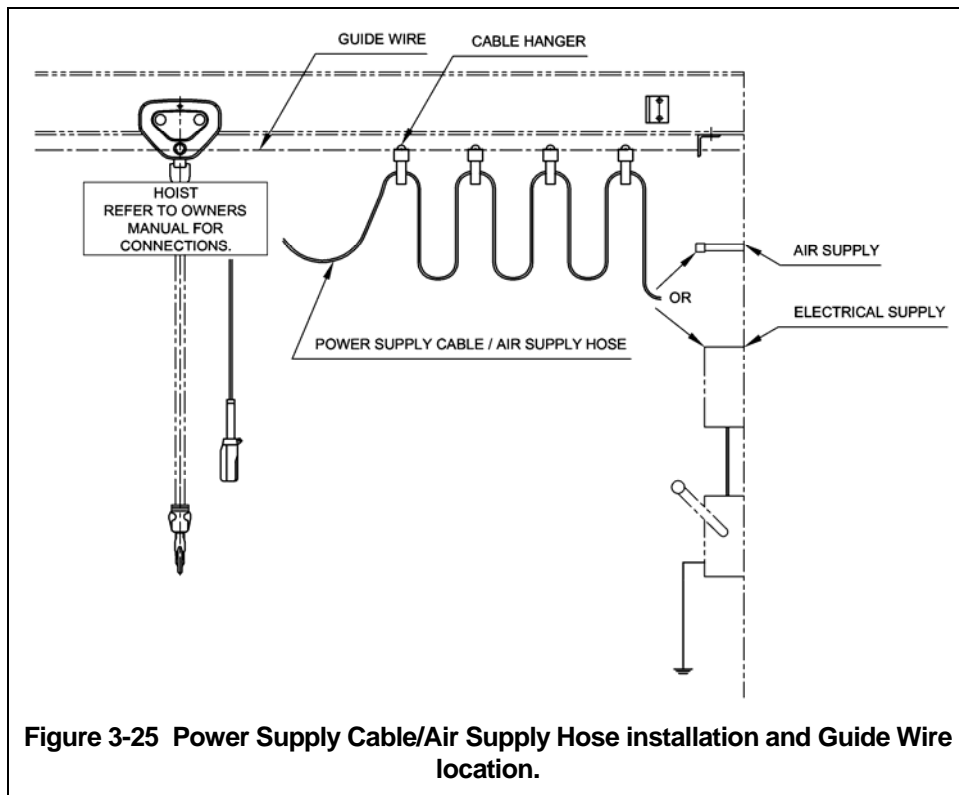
Power Supply Cable/Air Supply Hose installation and Guide Wire location.
